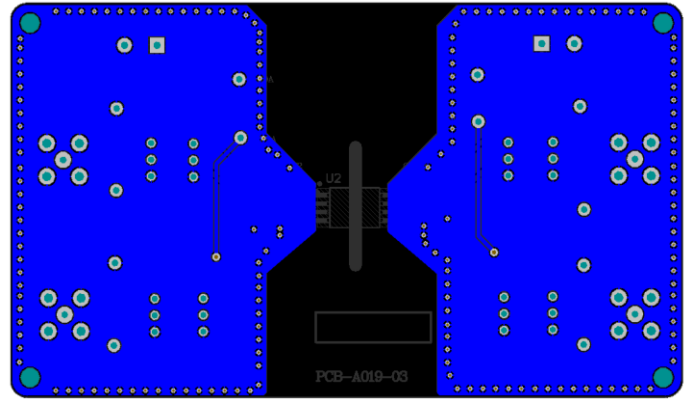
The CA-IS3020G EVM PCB Layout_ Bottom
